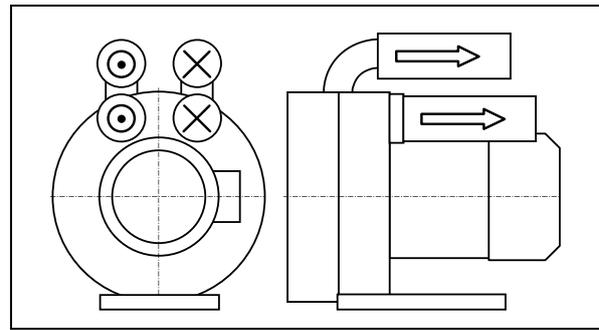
2BH1840-7L... (two-impeller pump-motor unit with double-flow design)
